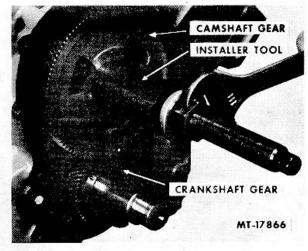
Installing Camshaft Gear With SE-1900 Installer Tool
